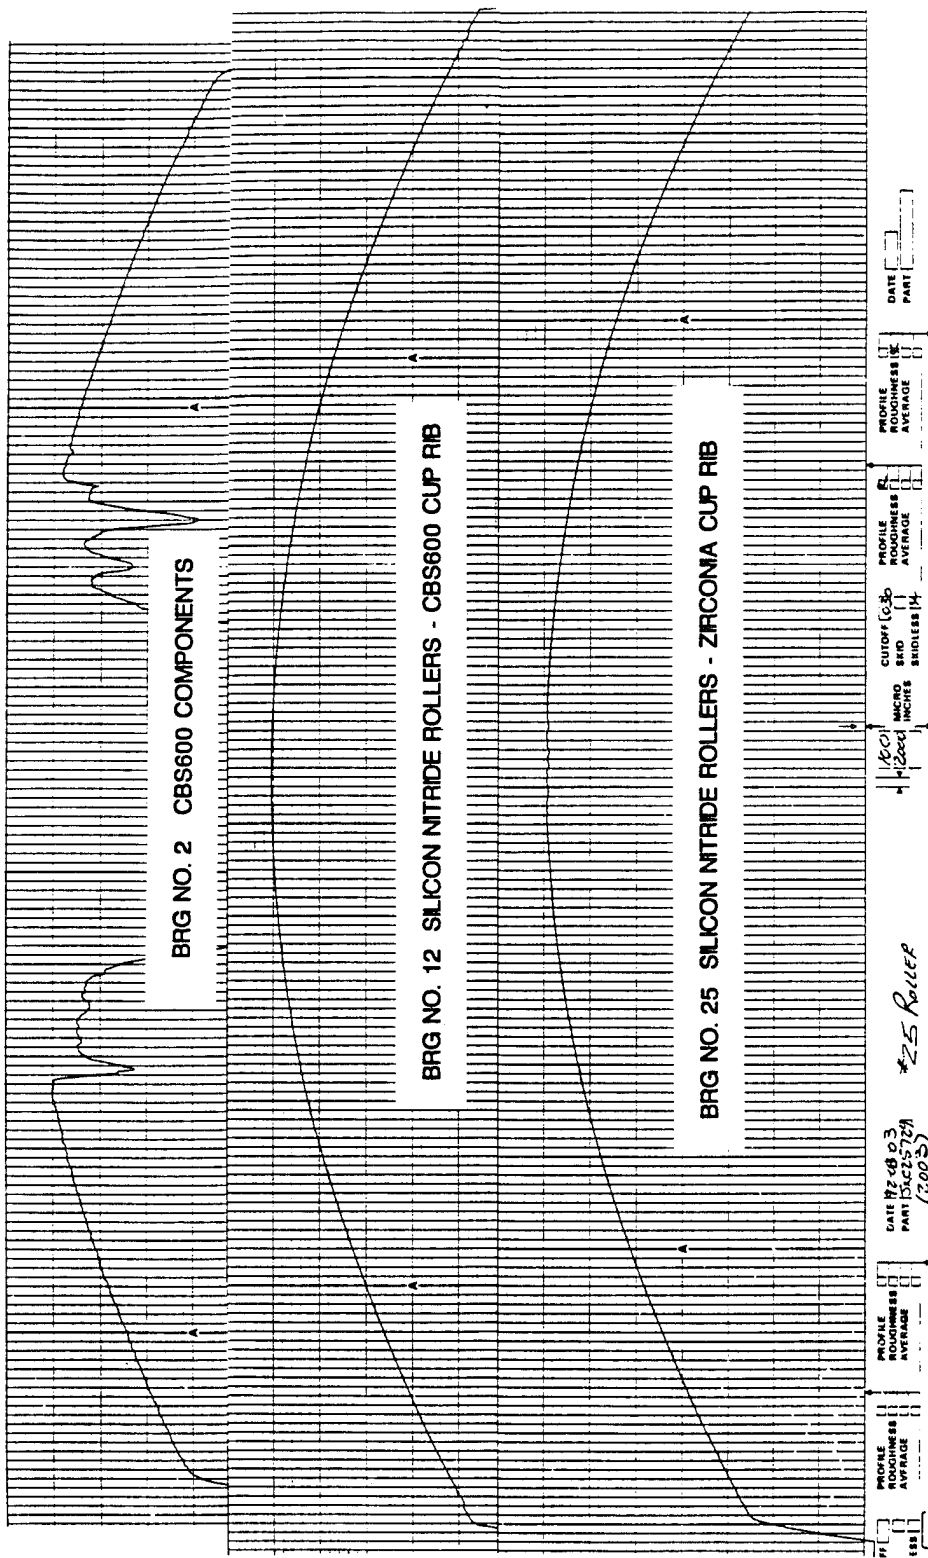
Posttest Roller Large-End Spherical-Radius Profiles of Conventional and Hybrid Bearings
